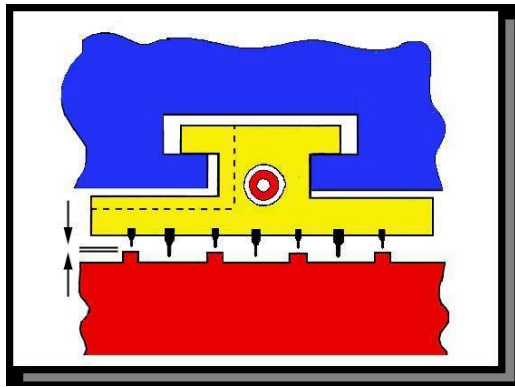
Cross Sectional View of Retractable Seal in Open Position During Startup.
